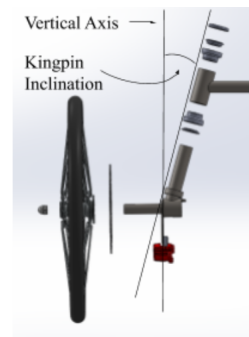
Exploded view of the steering assembly illustrating how the kingpin inclination impacts the design of the wheel assembly
